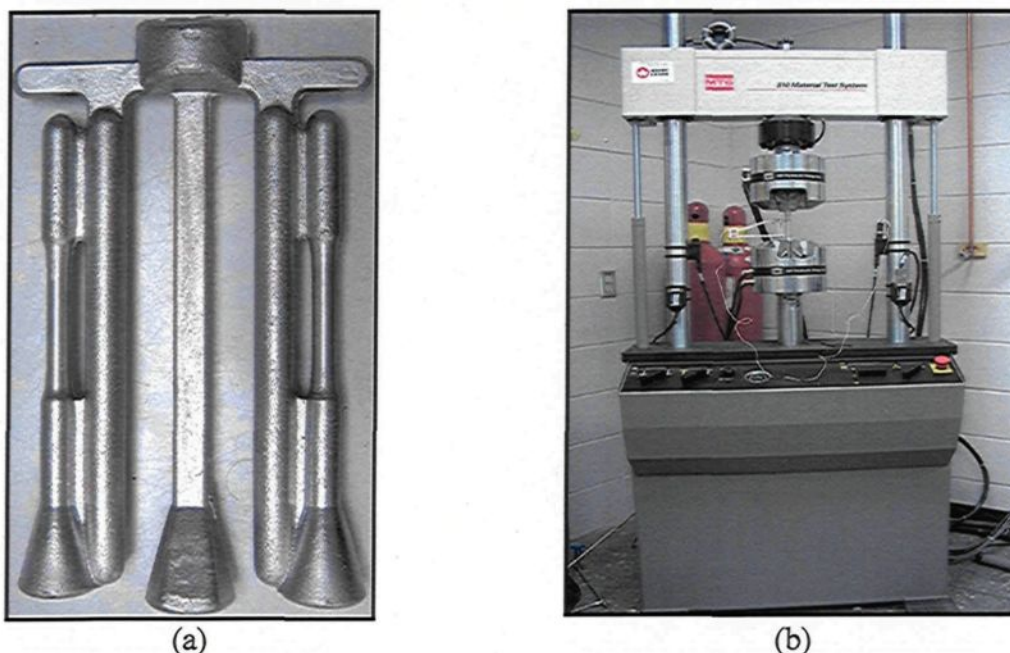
(a) Actual tensile test bar casting; (b) MTS servohydraulic mechanical testing machine.
